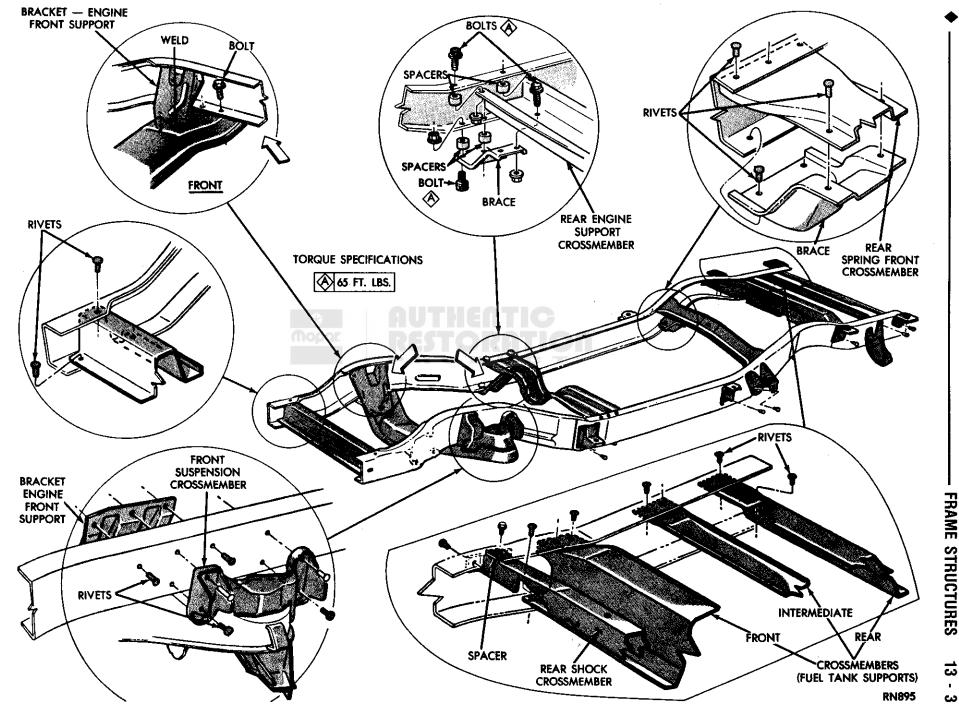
AD4 Frame Structure with Body Mount and Suspension Brackets
